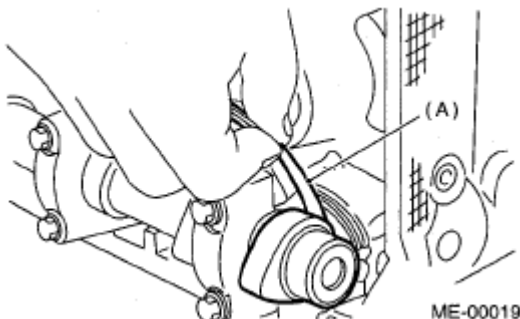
Measuring Cylinder Intake Valve And Cylinder Exhaust Valve Clearance
